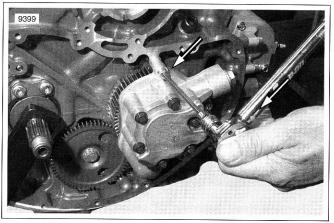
Oil Pump Installation @ 9.7 Nm (85 in-lbs)
